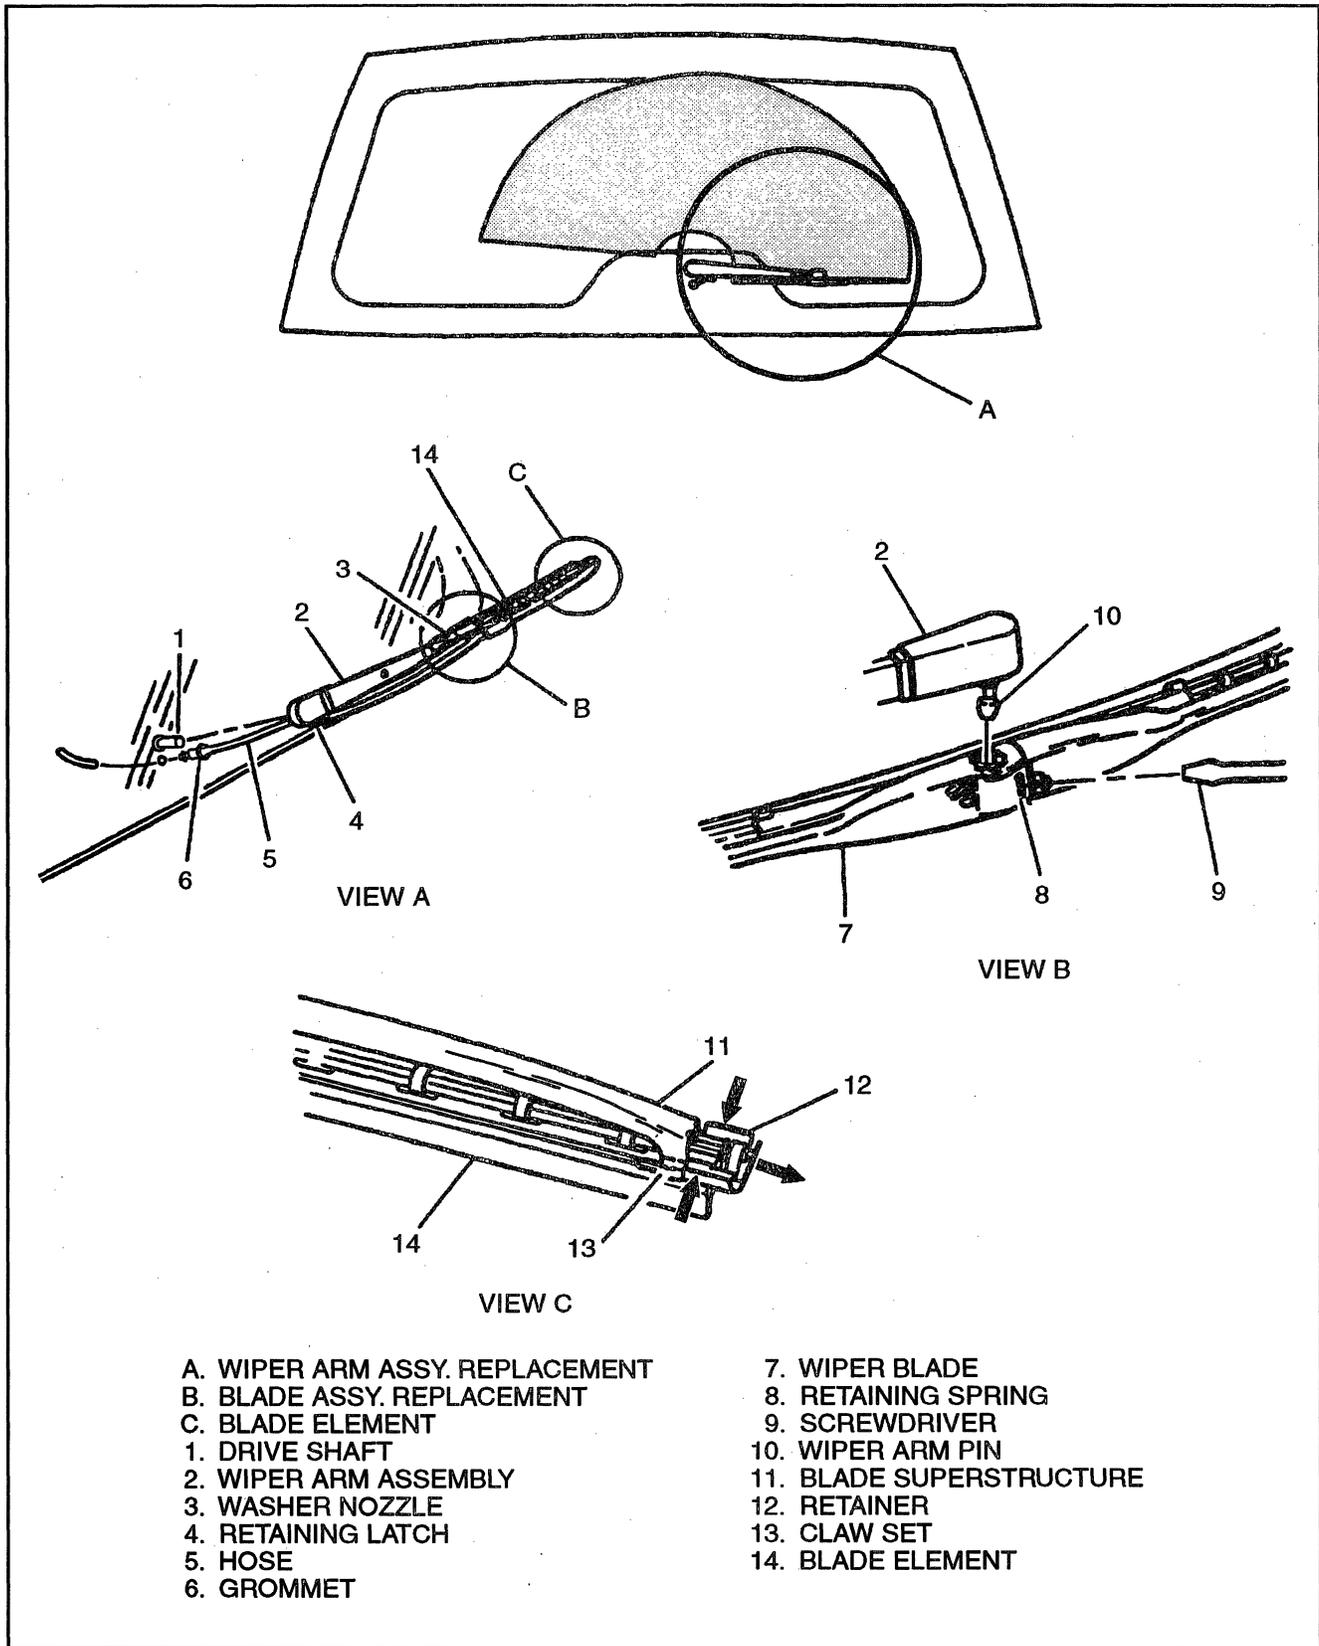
Wiper Arm Assembly, Blade, and Element Replacement
